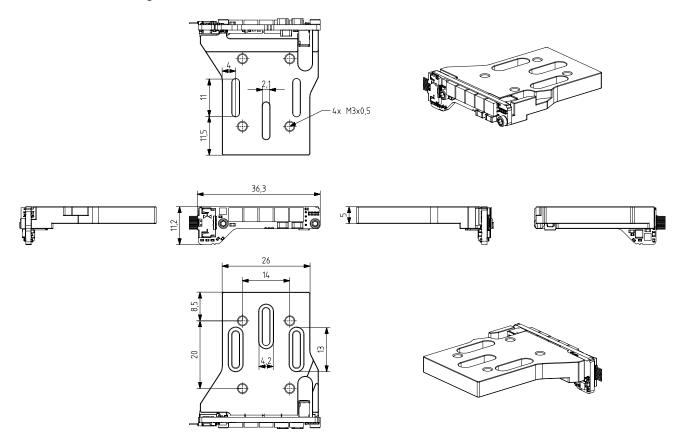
Dimensional drawing of VCSEL-SLIM-W-AR
